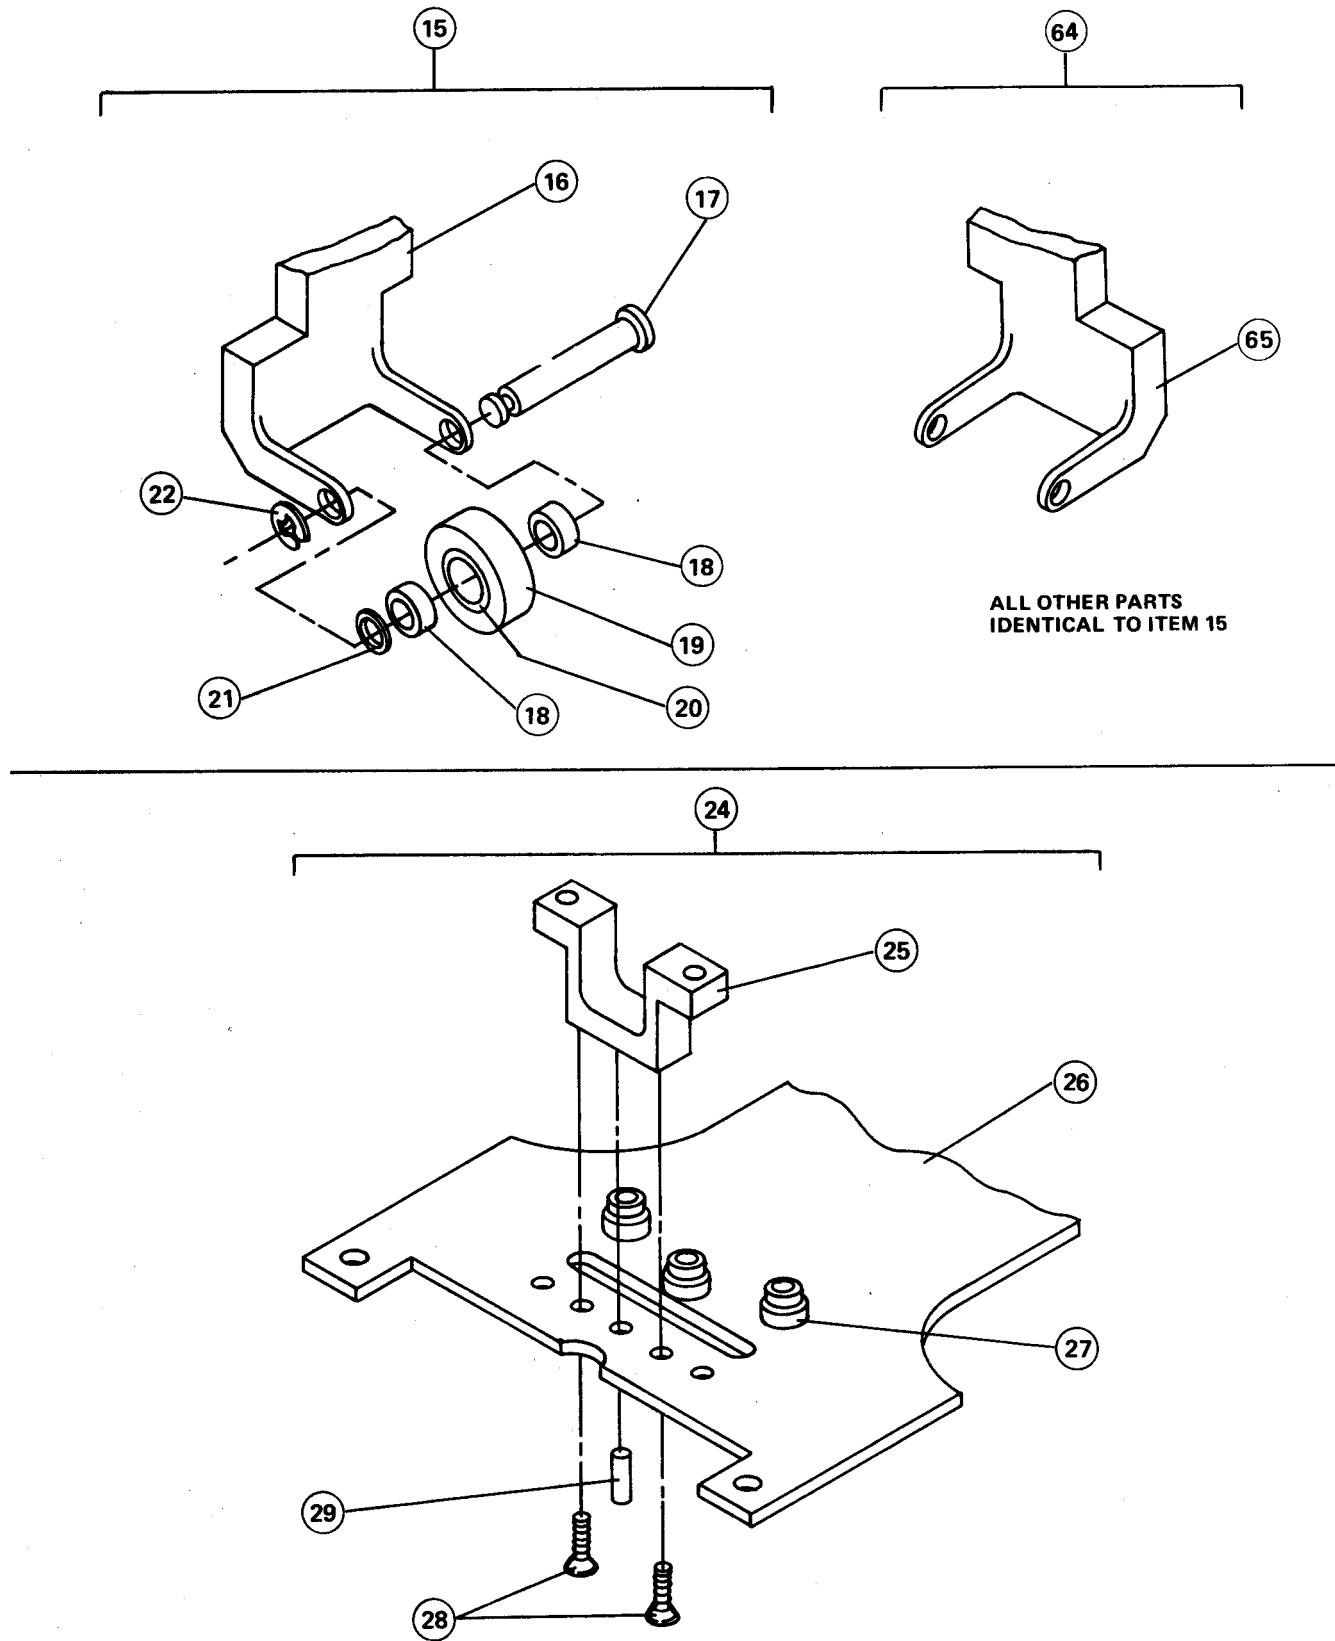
Slide plate subassembly (sheet 2 of 2)
